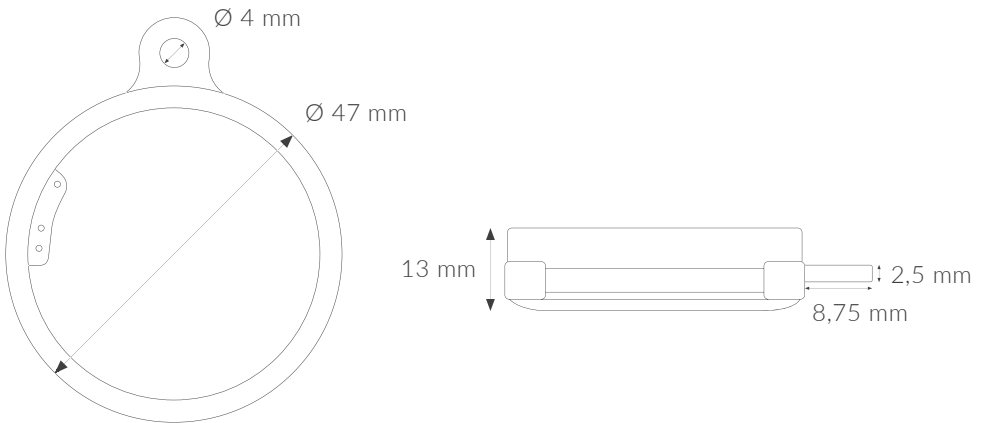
Dimensions of the device in one handle (mounting hole) installation option.
